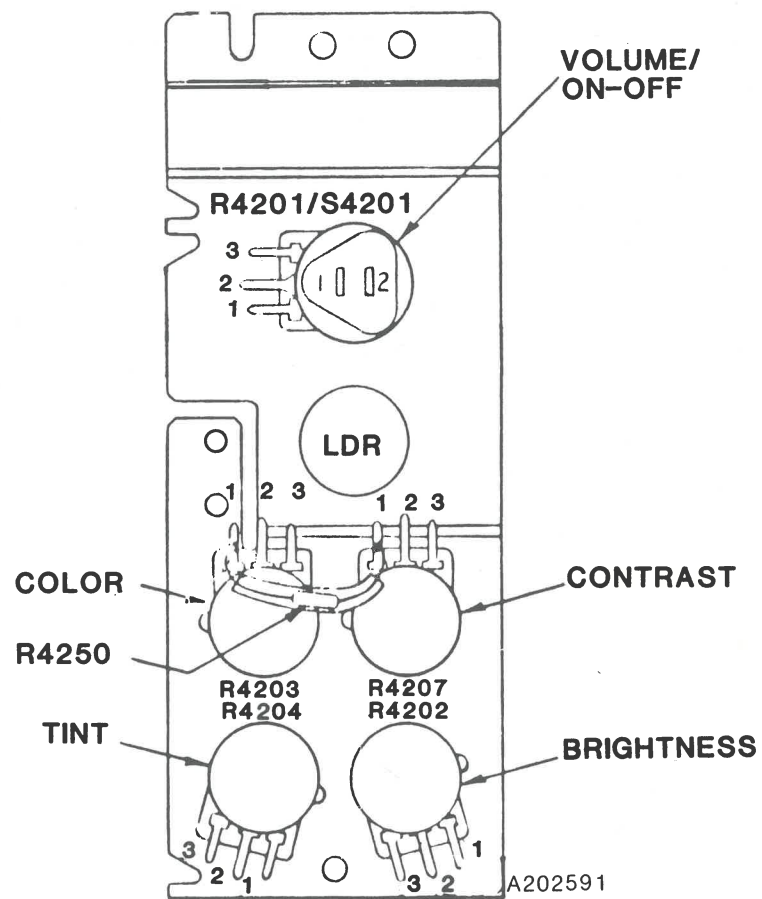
Auxiliary Control Assembly Models FJR475-FJR476
